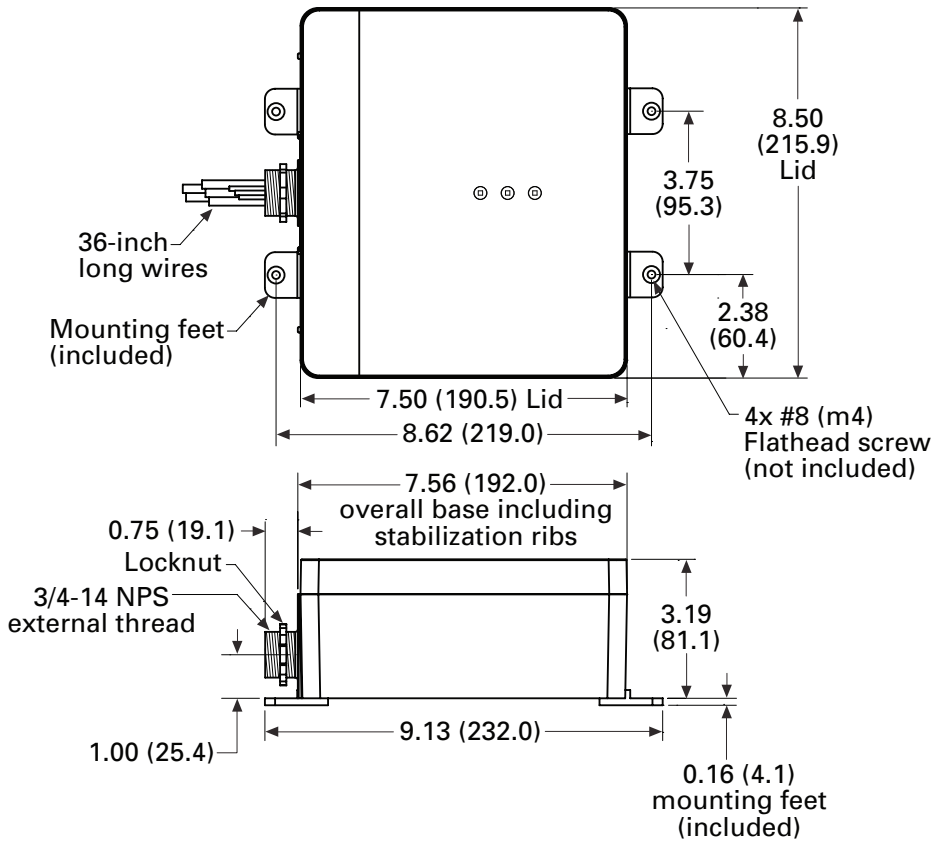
P2 enclosure, NEMA 4X with mounting feet dimensions, weight = 4 lb
